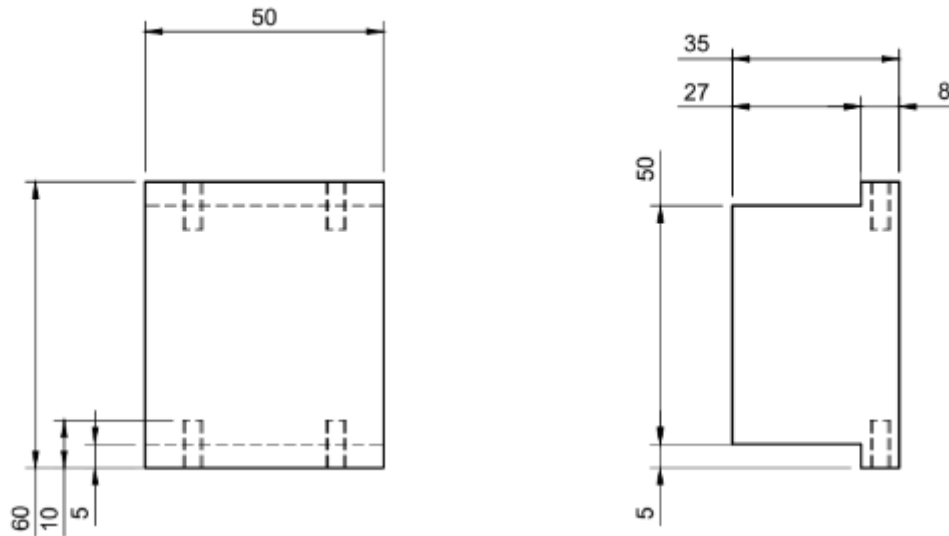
technical board of the adopted building platform designed by Sharebot
